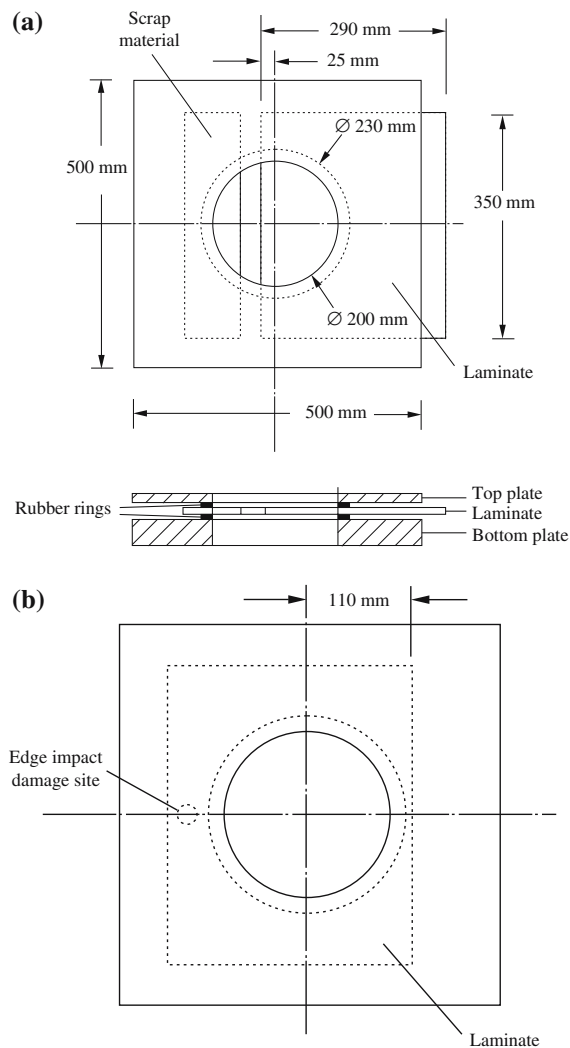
Dimensions of the clamping arrangement and the location of the laminate prior to impact for (a) edge impacts and (b) central impacts
